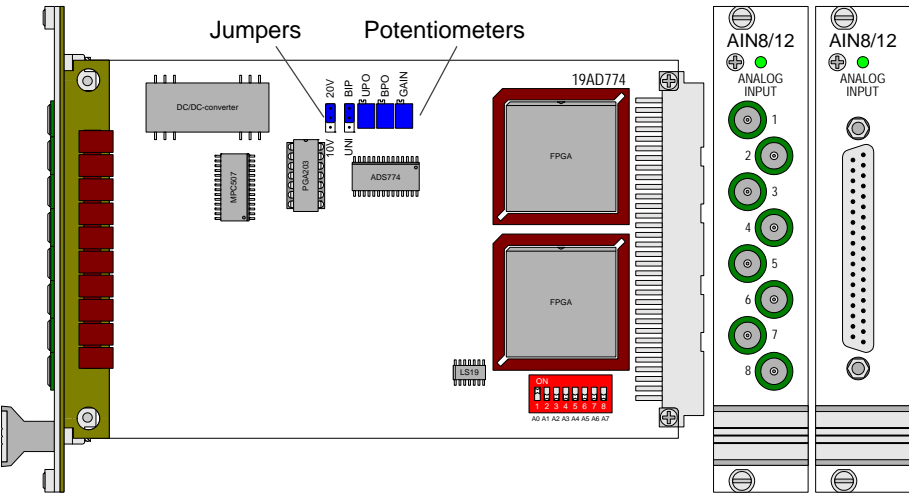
Pro-AIn-8/12 REVA: Board and front panel
